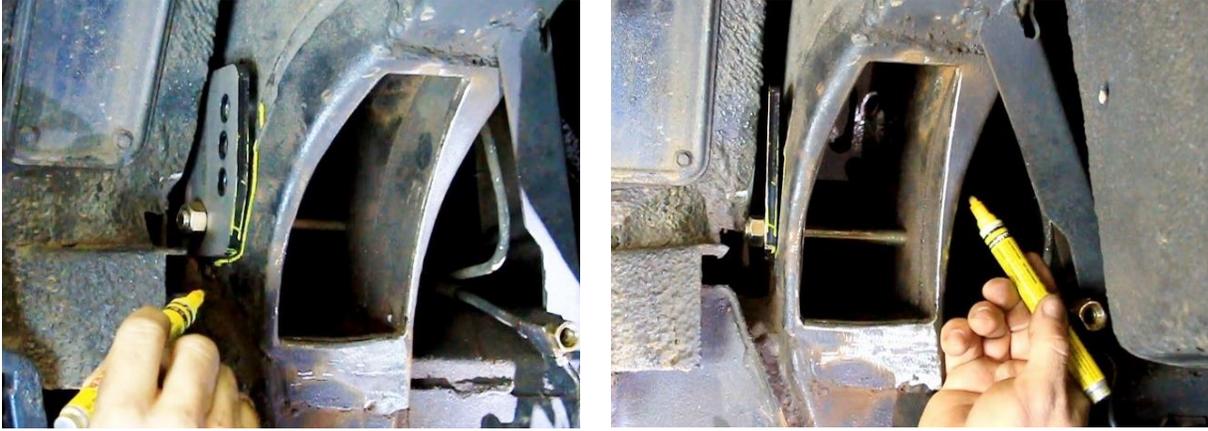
Trace Outer and Inner Frame Doubler Plates
